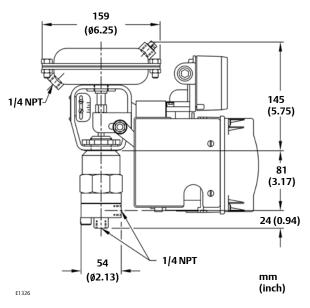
81000 Inline Valve with Baumann 16 Actuator and FIELDVUE DVC6000 Digital Valve Controller
